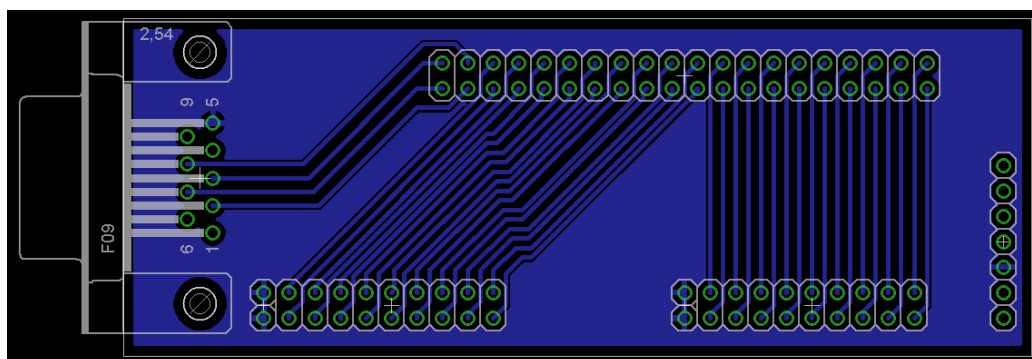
Spartan 3 adapter for DAC and ADC prototypes.
